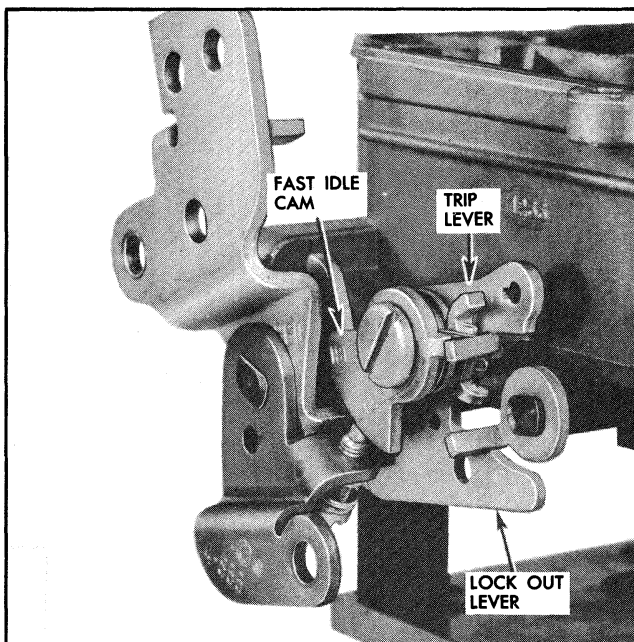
B-82 Location of Fast Idle Cam and Lockout Lever
